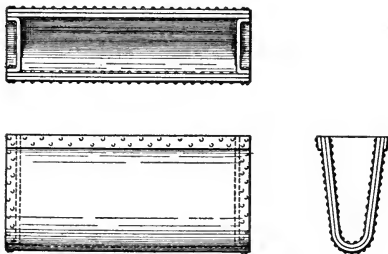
PLAN AND ELEVATIONS OF KETTLE
